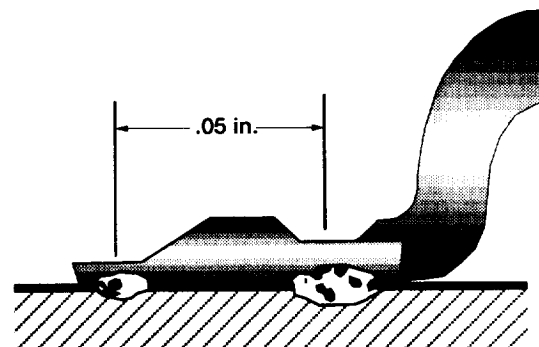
Relative locations of thermocouple spot welds.
